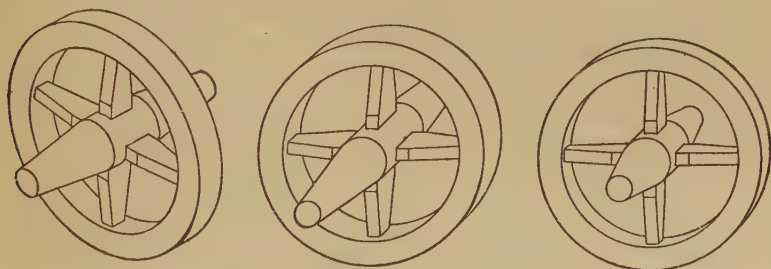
Isometric, oblique and cabinet drawing compared.
